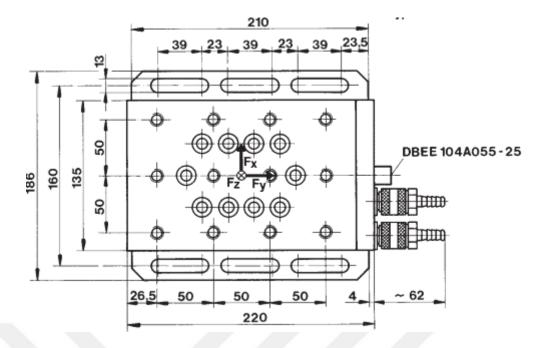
Technical drawing of the Kistler dynamometer [92]
